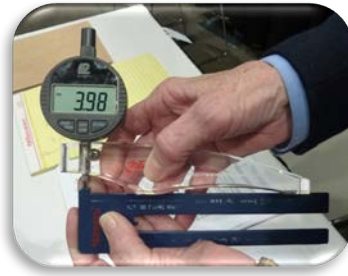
Easy method for checking the net gauge by using the digital thickness device
